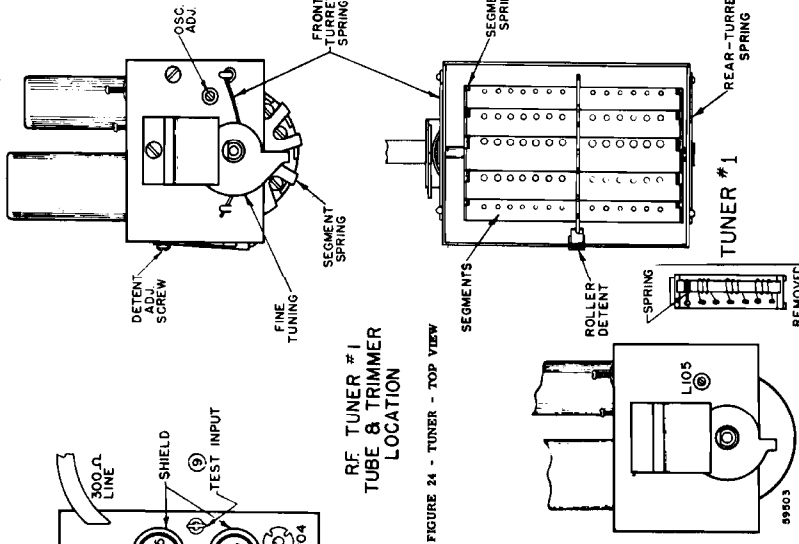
TUNER #1 TUBE & TRIMMER LOCATION
